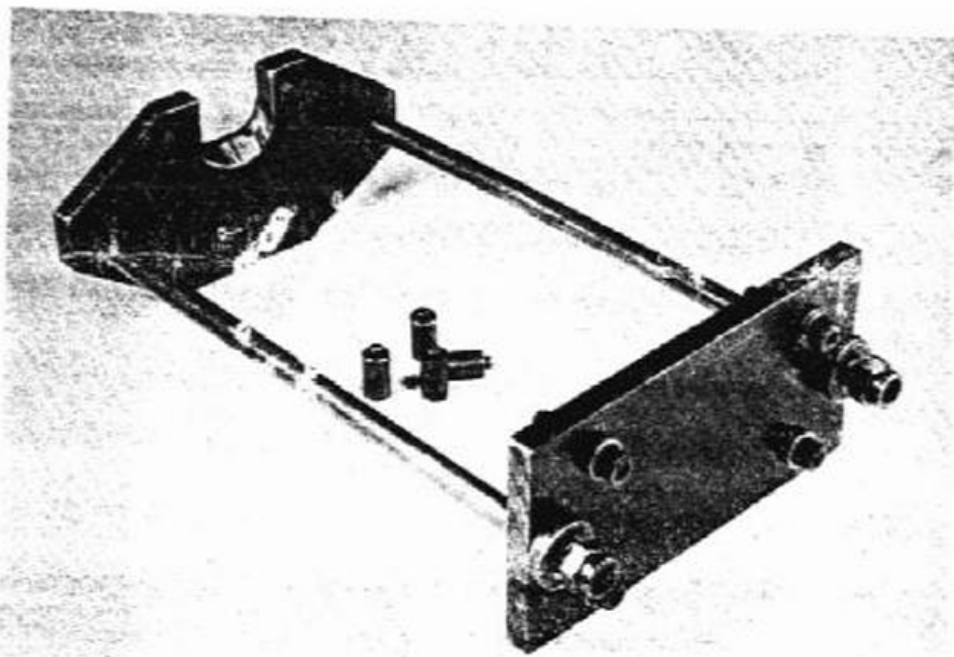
Reinforcement for the cylinder block. The four small pieces hold the upper plate off the cylinder head fins.
